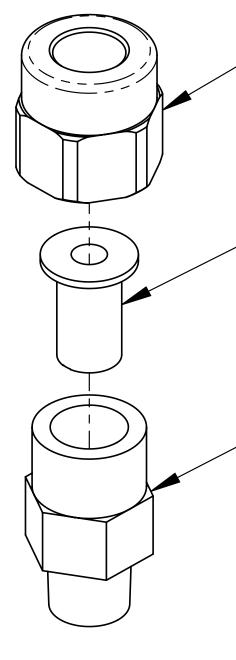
Cartridge Filter Assembly 000-049-261 Rev. A
